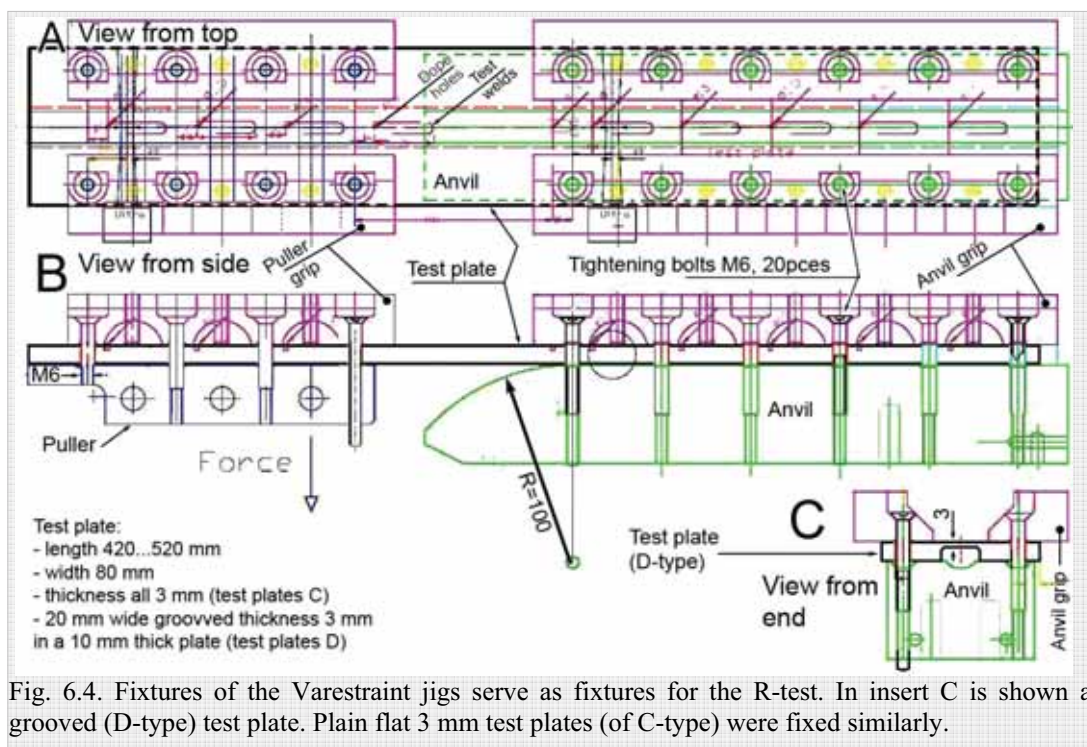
Fixtures of the Varestraint jigs serve as fixtures for the R-test. In insert C is shown a grooved (D-type) test plate. Plain flat 3 mm test plates (of C-type) were fixed similarly.
